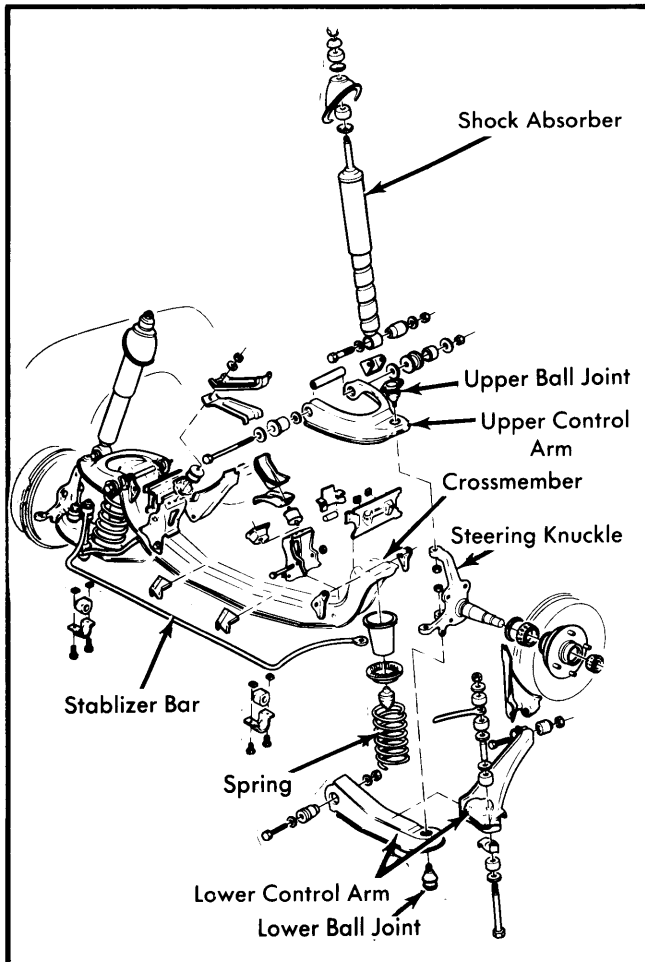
Exploded View of Chevette & T1000 Front Suspension Assembly
